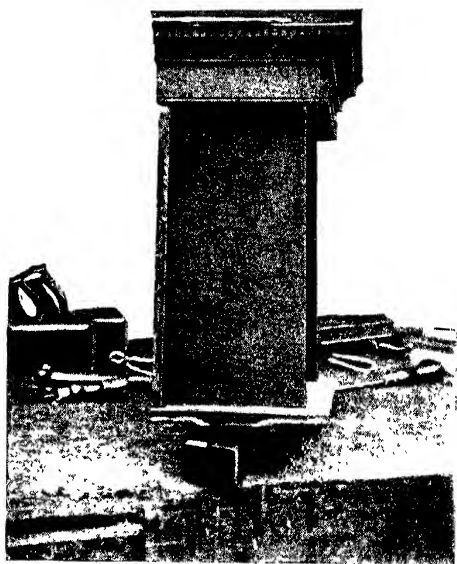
Side View of Clock Case Head, showing Broken Mouldings
